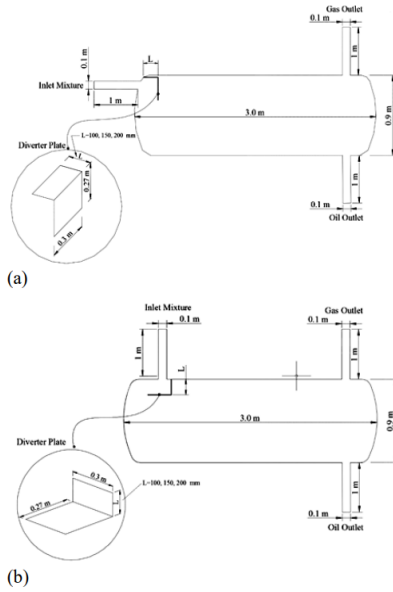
Geometry and dimensions of two different separator arrangement a) separator with side inlet pipe, b) separator with top inlet pipe.
